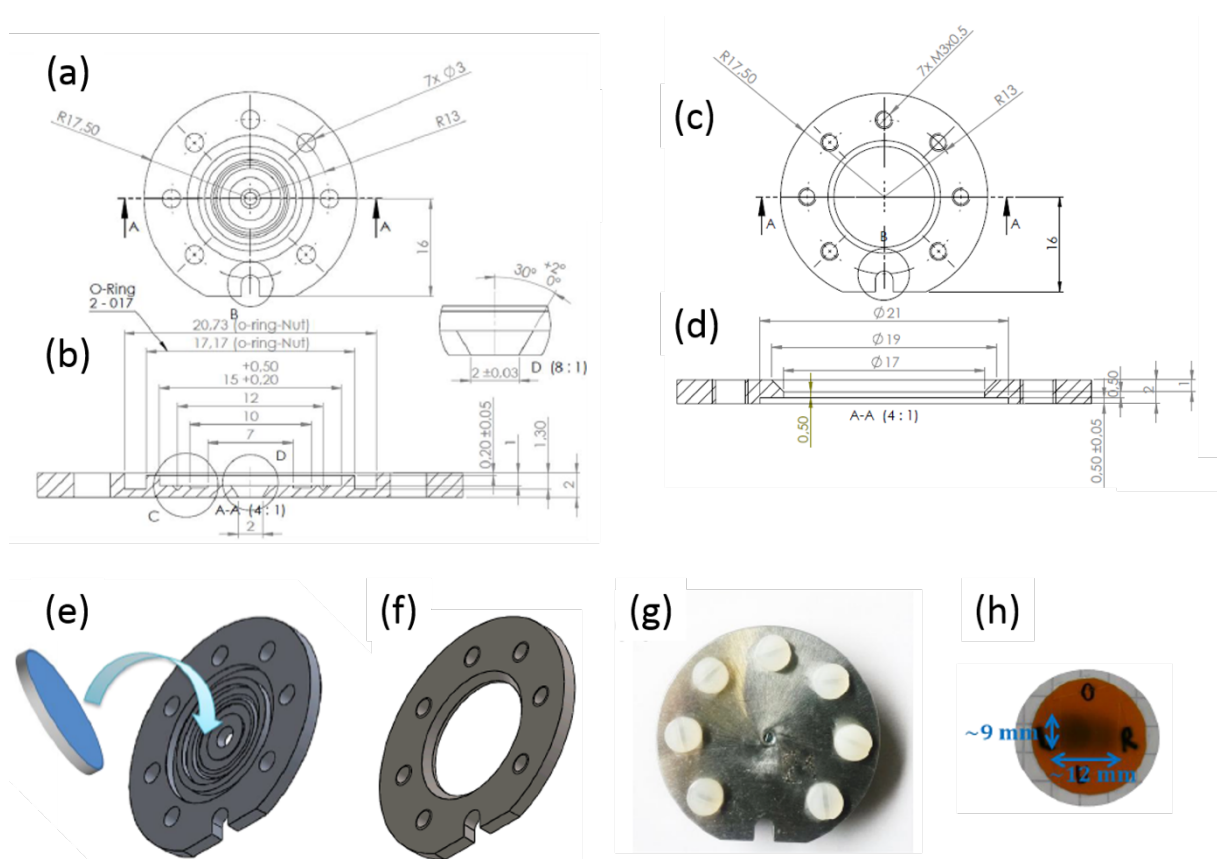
Airtight target box for triton analysis [92]. (a) Technical drawing top view of the Al front plate with a pinhole aperture of 2 mm in the center covered with an Al coated mylar foil; (b) A-A cut of (a); (c) Technical drawing top view of the Al back plate; (d) A-A cut of (c); (e) Isometric view of the inner side of the front plate and illustration of the positioning of the target sample therein; (f) Isometric view of the outer side of the back plate; (g) Real image of the fully assembled target box with PTFE screws; (h) Cold neutron beam spot at the target position for an average neutron energy of 1.8 meV (6.7 Å), a neutron flux of 2.7×10^8 - 1.7×10^{10} neutrons $\text{cm}^{-2} \text{s}^{-1}$ and a beam size of 9 mm x 12 mm.
